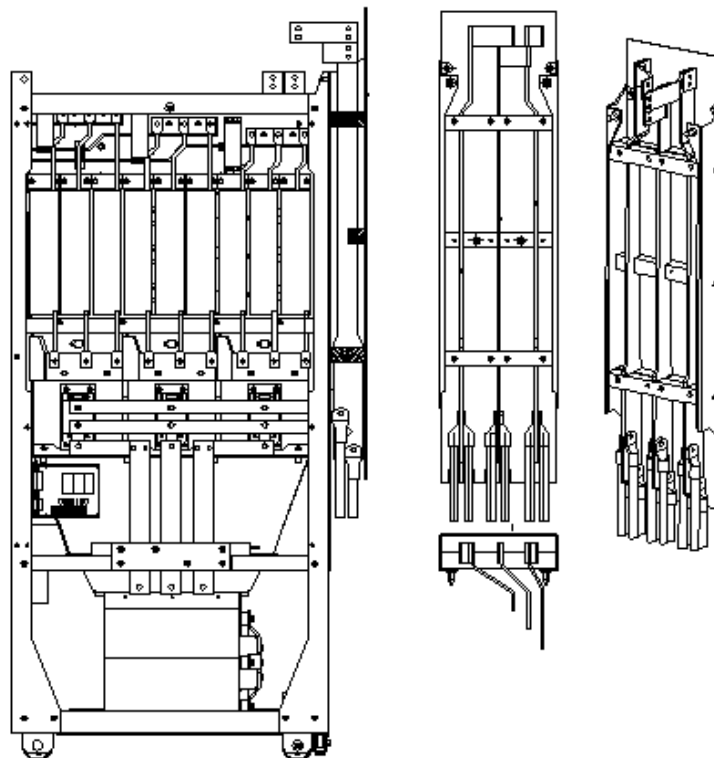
AFE 3D drawings – Rear kit bar AC OUTPUT
